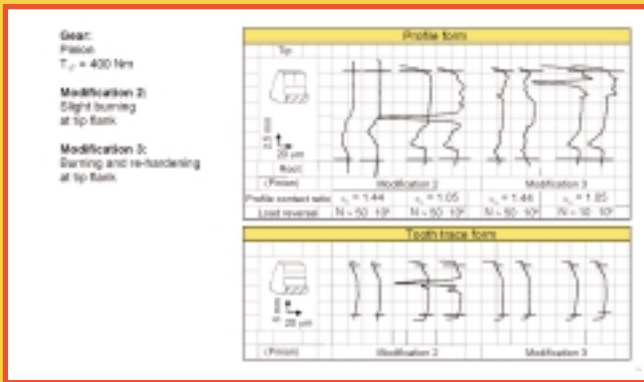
Test gear wheel after use, depending on profile contact ratio.
